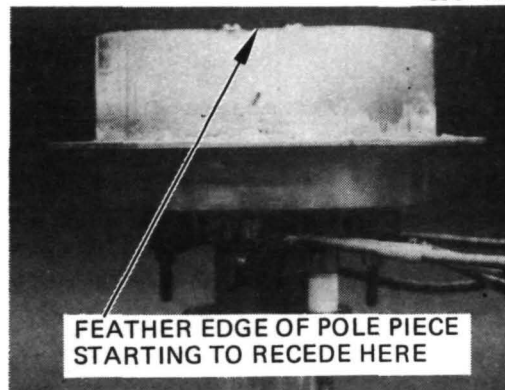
Cathode pole piece/magnetic baffle assembly.
